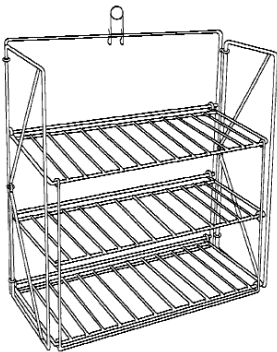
Example of a design for a collapsible superposed wire-shelved unit.
